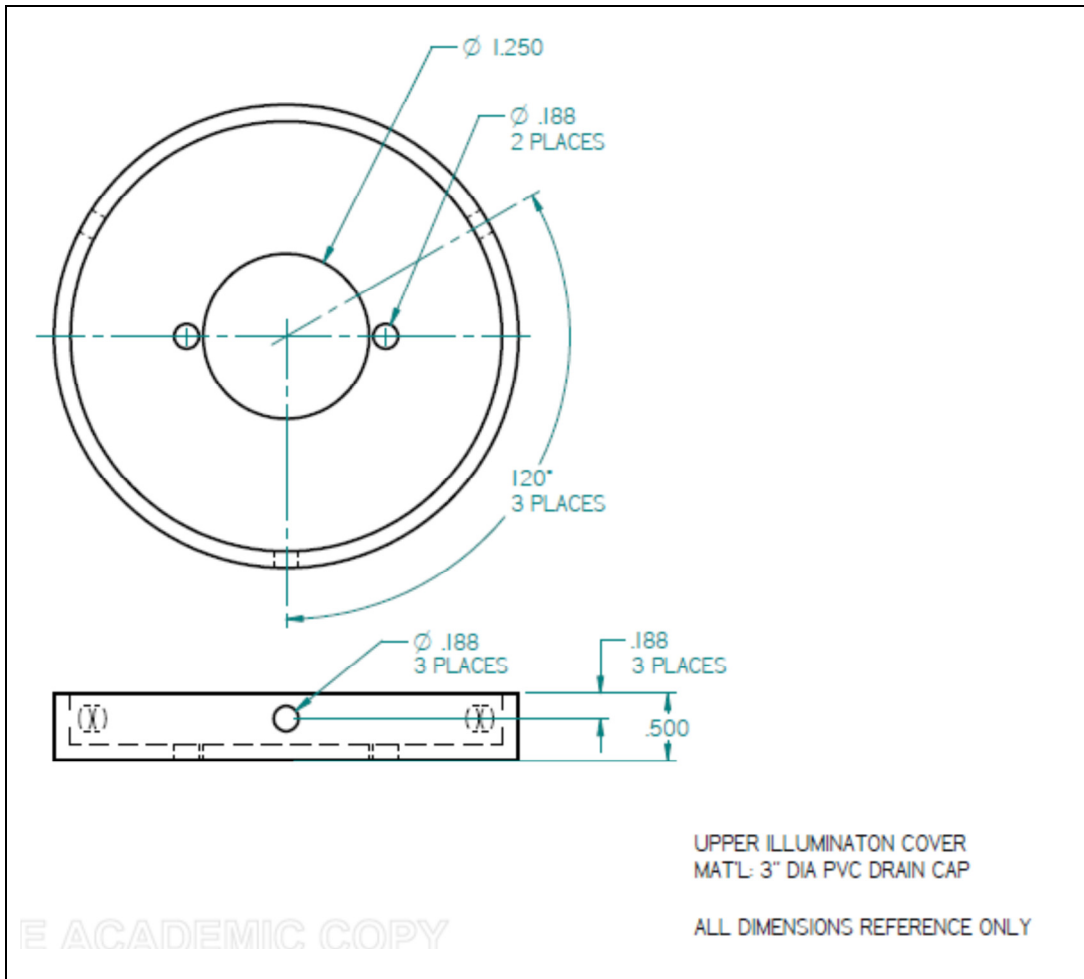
Dimensioned Drawing of the Upper Illumination Cover
